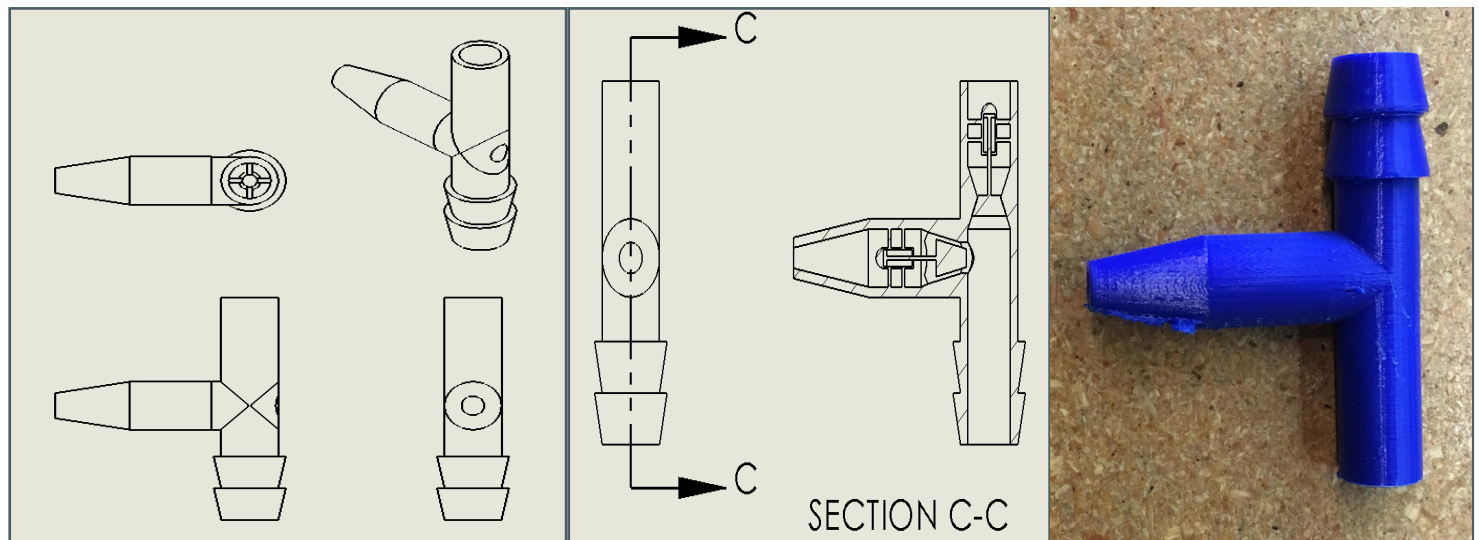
Various views of the Maple Relief Valve Tap, designed and 3D printed using Solid Edge, and SparQ Studios
